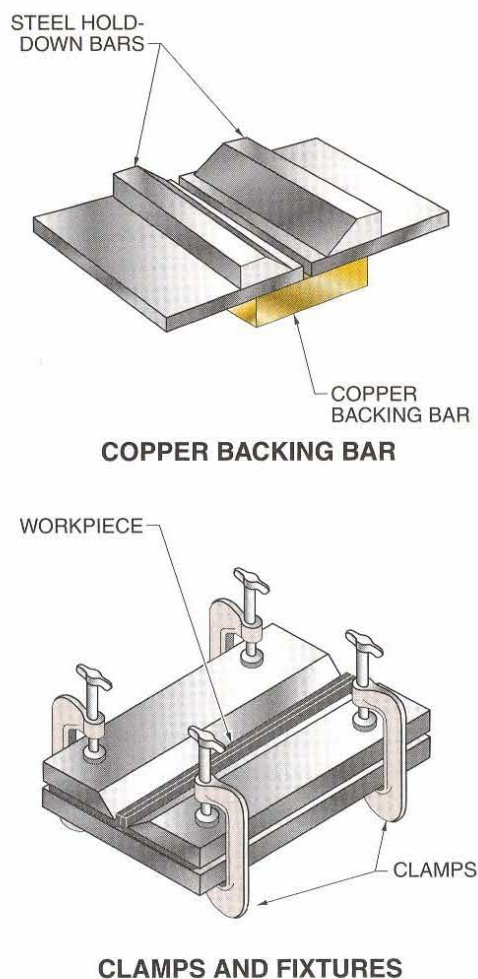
Copper backing bars reduce heat and warpage of the weld area. Clamps and fixtures are used to hold pieces firmly together in position to prevent distortion.
